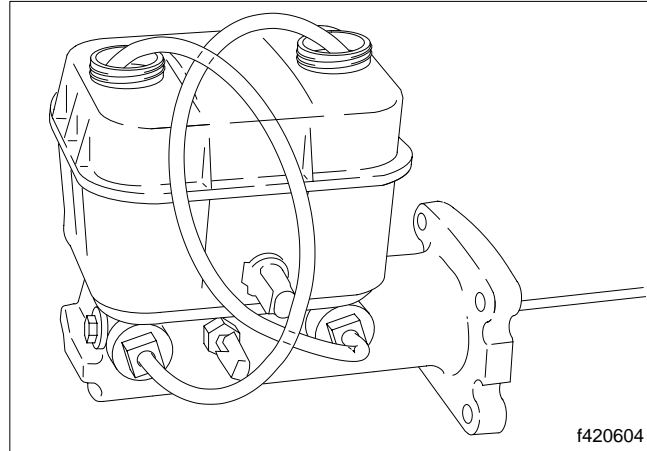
, Outlet Ports With Master Cylinder Bleeder Tubes
